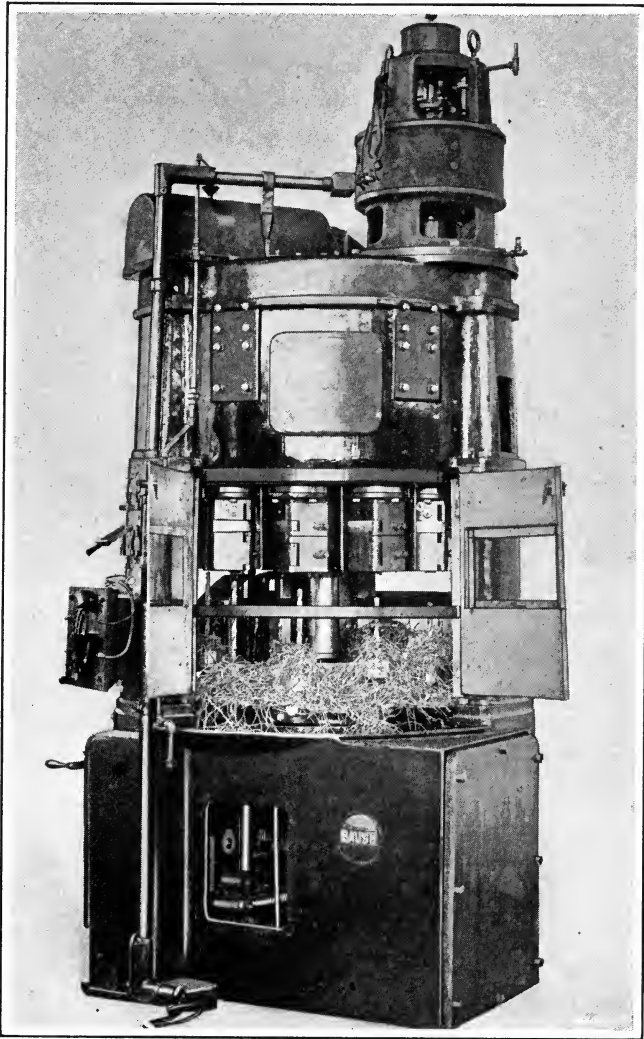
Station-type Drilling Machine for Drilling Rifle Bolts and Receivers
